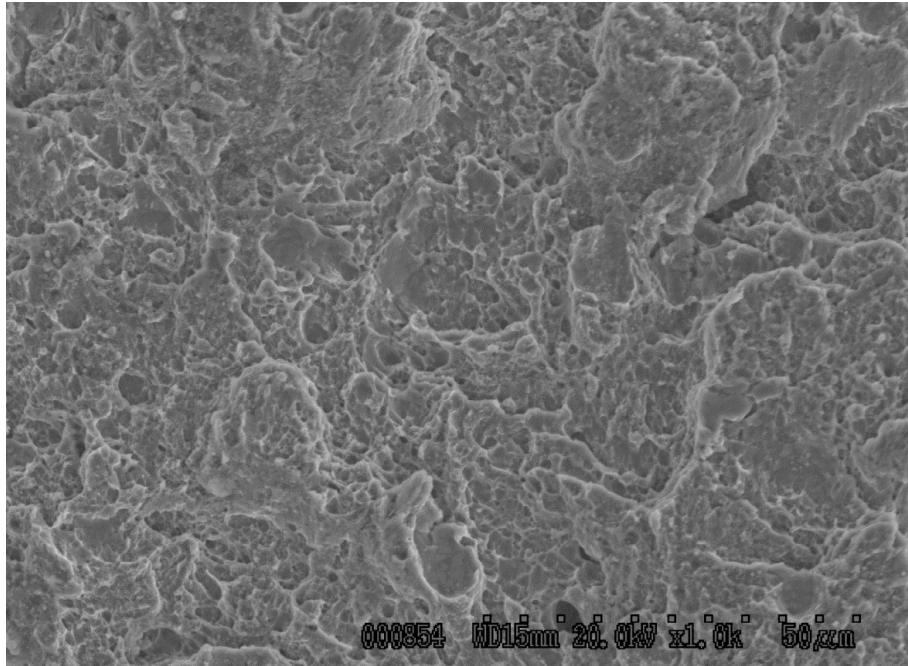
Scanning electron microscope fractograph of blade airfoil fracture surface at Area "855" shown in Fig. 283.
